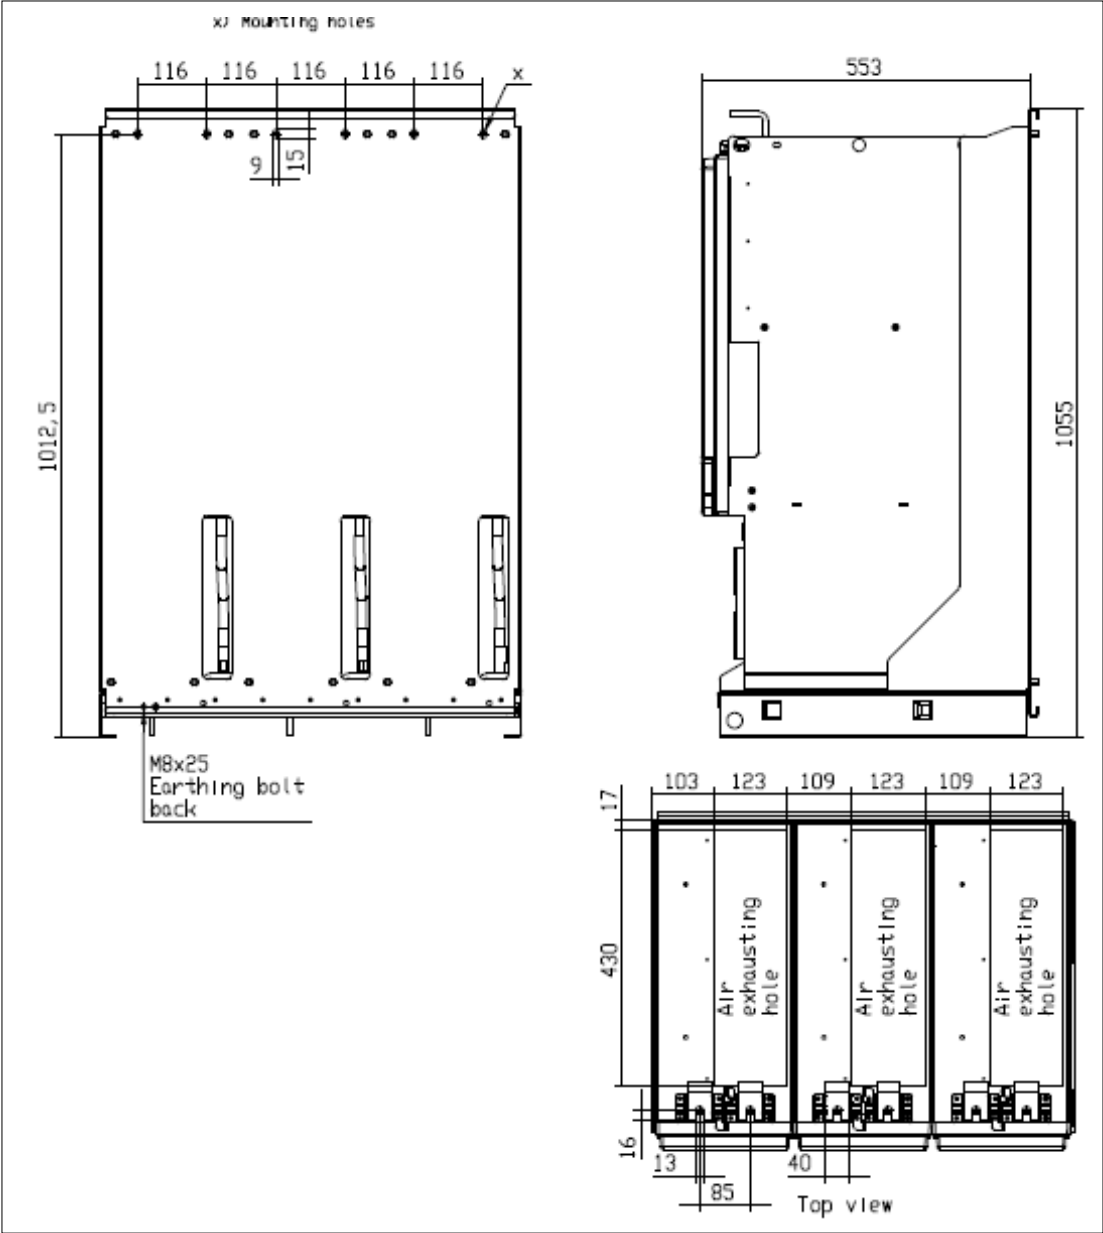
VACON® NXI dimensions, FI13 back view. Note, FI14 is a double FI13
